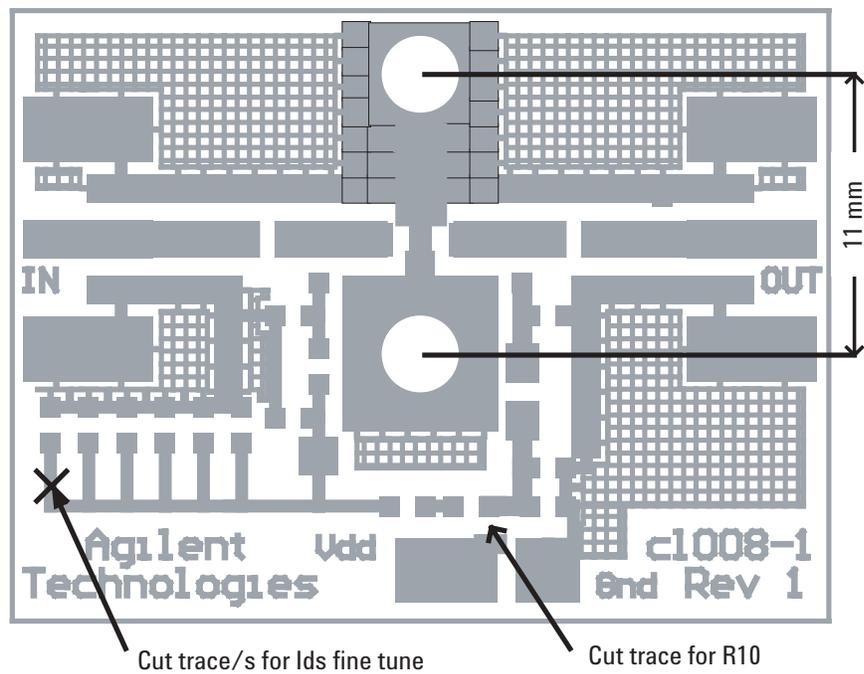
Positions of PCB trace cuts and distance between heatsink screws
